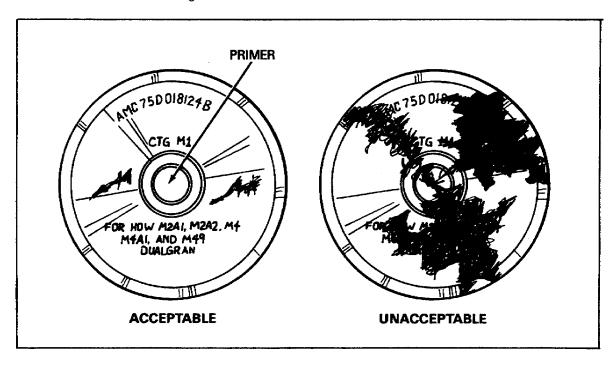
Inspecting the Primer for Rust and Corrosion.
